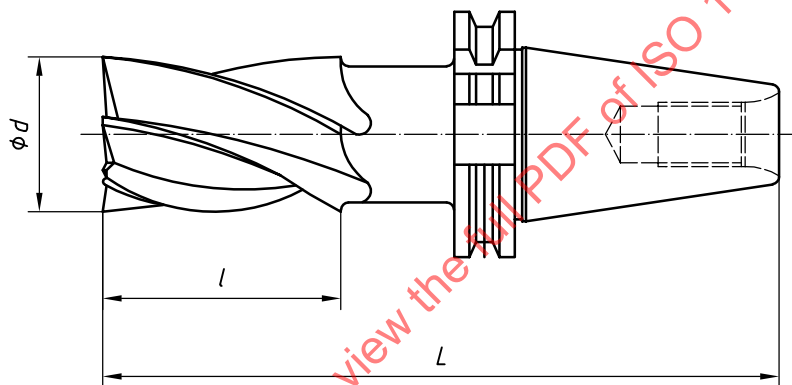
Milling cutters with 7/24 taper shanks for automatic changers
